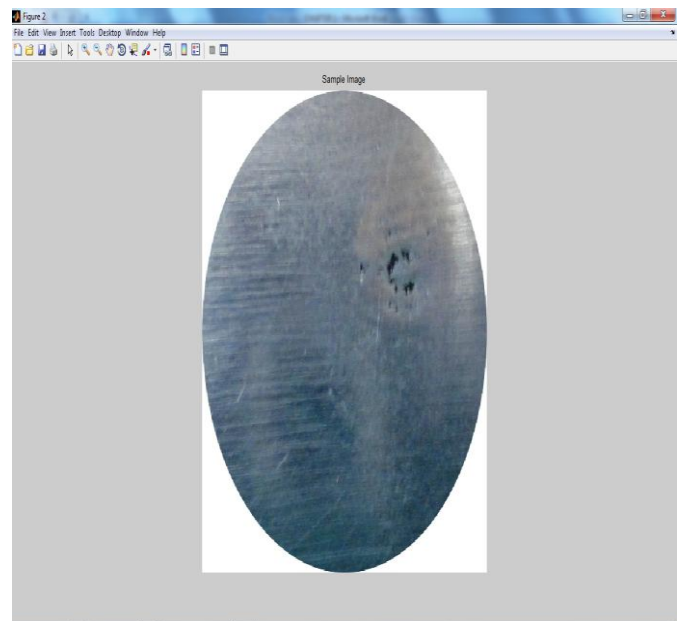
Cross sectional view of Steel Rod Surface Sample image
